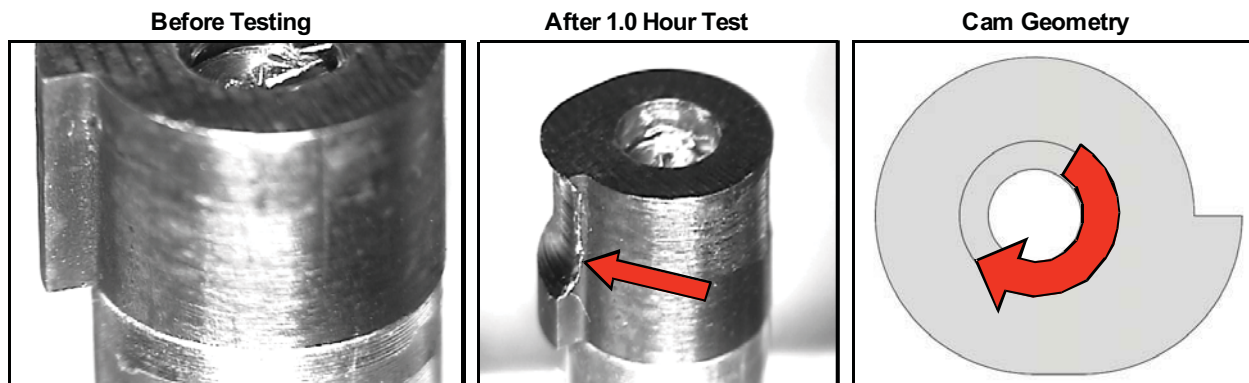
17-4 PH Prototype Cam Wear and Geometry
